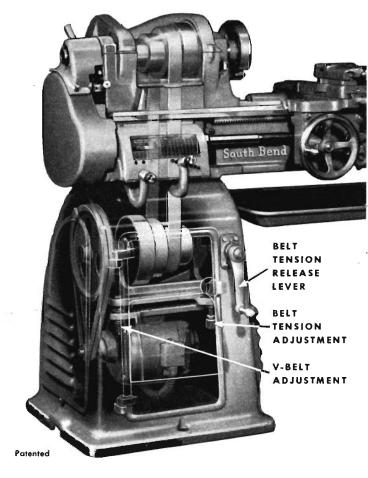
Underneath Motor Drive Arrangement for 10"-1" Collet Bench Lathes
